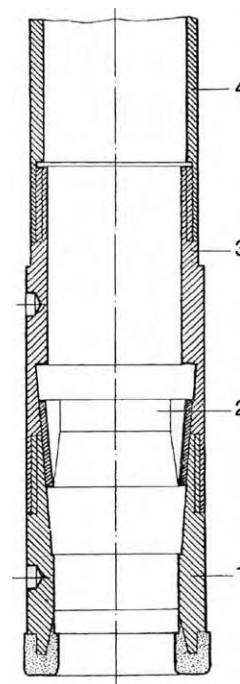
Conventional core drilling string. 1, Diamond bit; 2, core breaker; 3, core breaker tube; 4, core barrel.
